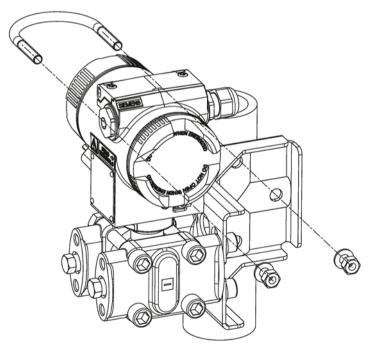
An example of fastening the pressure transmitter on the mounting bracket in the case of differential pressure and horizontal differential pressure lines
